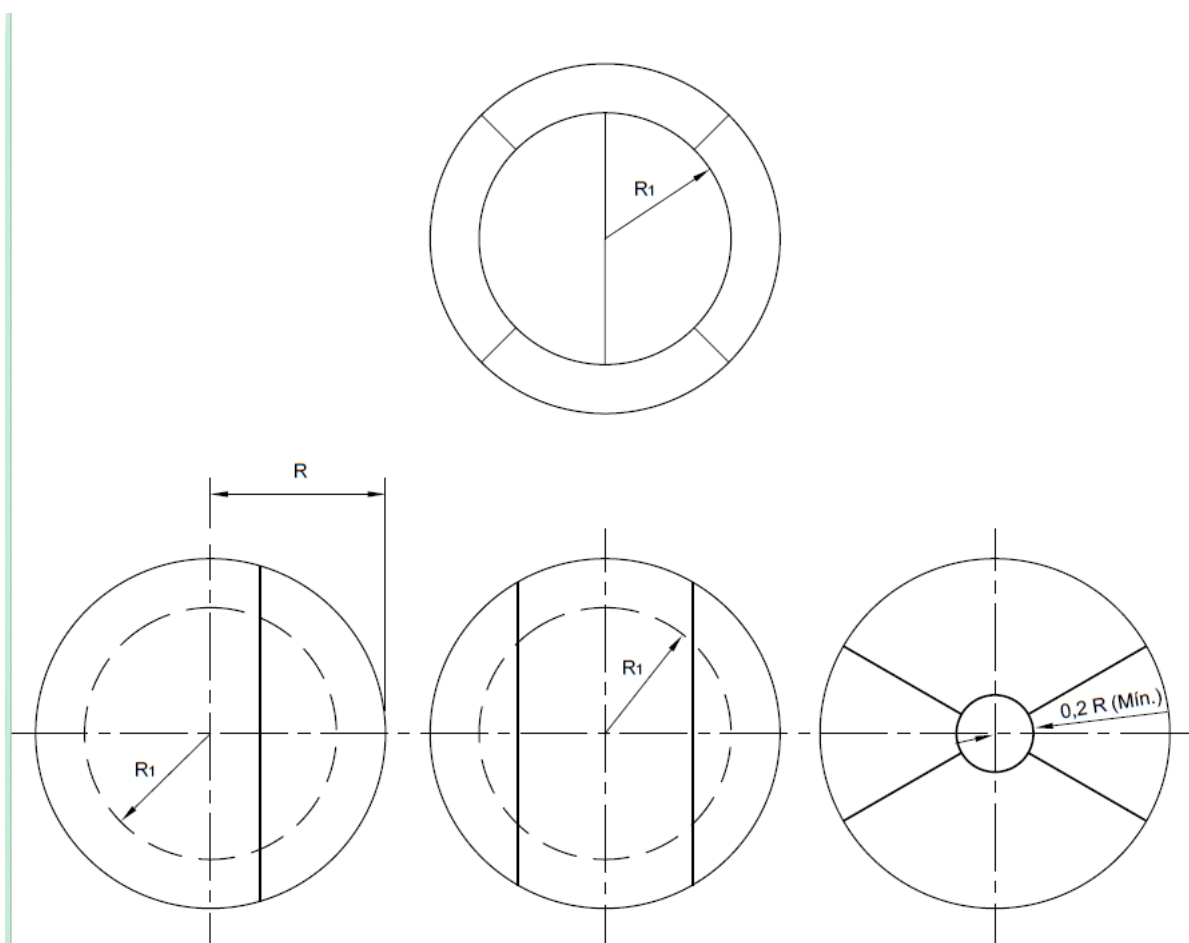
Examples of Permitted Weld Arrangements
